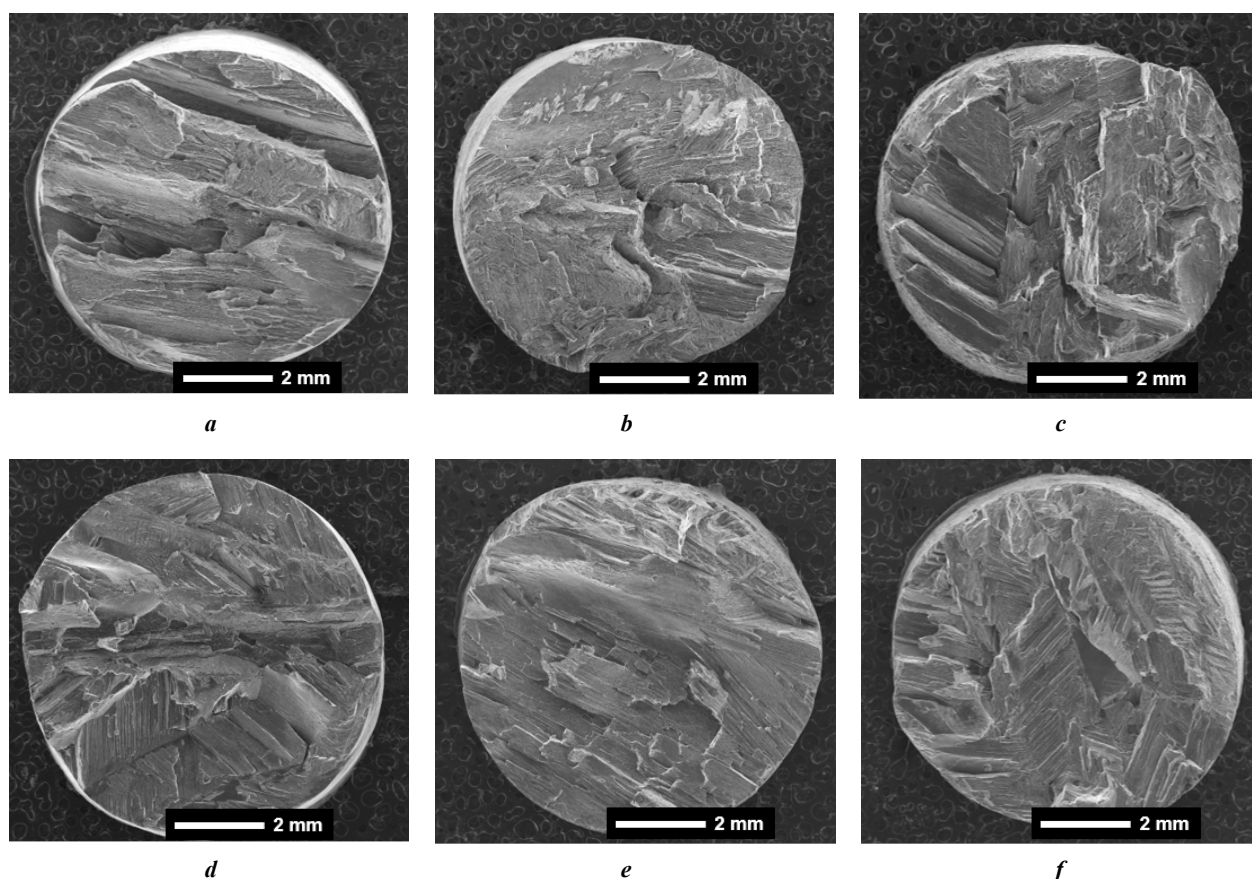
The appearance of the fracture surface of the technically pure magnesium specimens tensile-tested in air: a, d – in the reference state; b, e – after the pre-exposure to a corrosive medium; c, f – after the pre-exposure to a corrosive medium and the removal of corrosion products: a–c – at a low ($5 \cdot 10^{-6} \text{ s}^{-1}$) strain rate; d–f – at a high ($5 \cdot 10^{-4} \text{ s}^{-1}$) strain rate.
